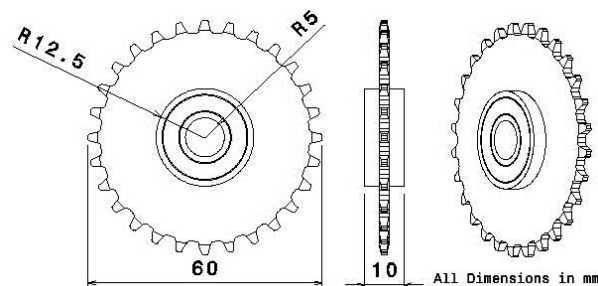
The Sprocket with Ball-Bearing for the Drive Mechanism
